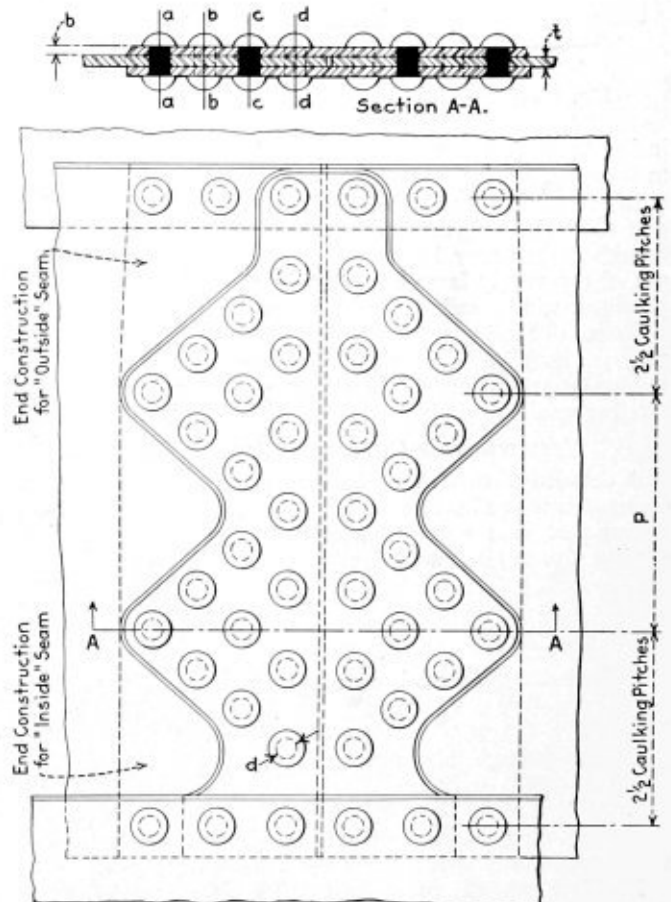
"Saw-Tooth" Joint, Quadruple Riveted
